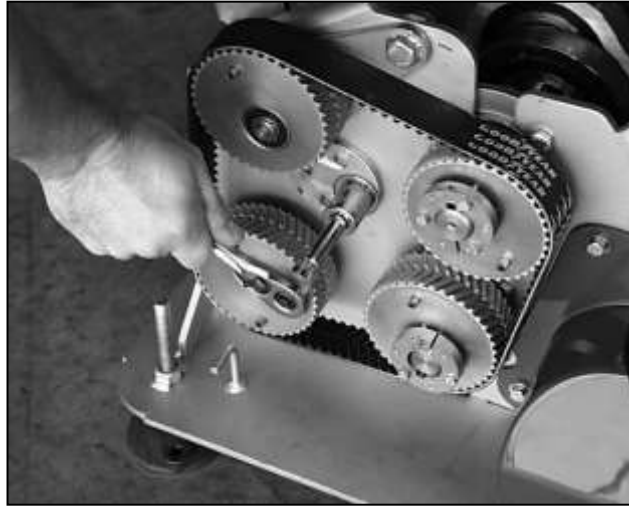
Loosening the Tensioner Cam Pivot Bolt
